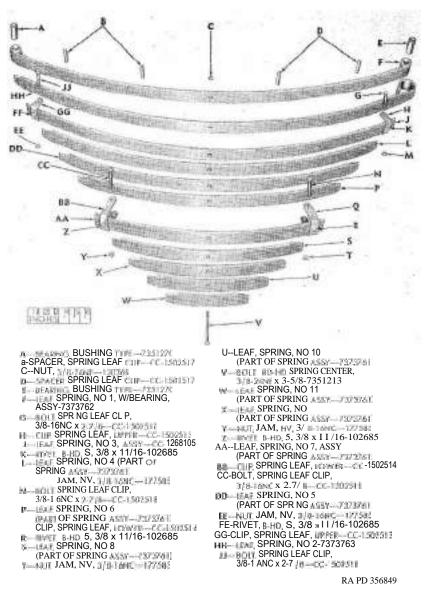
Rear spring assembly—truck models M37 and M42—exploded
